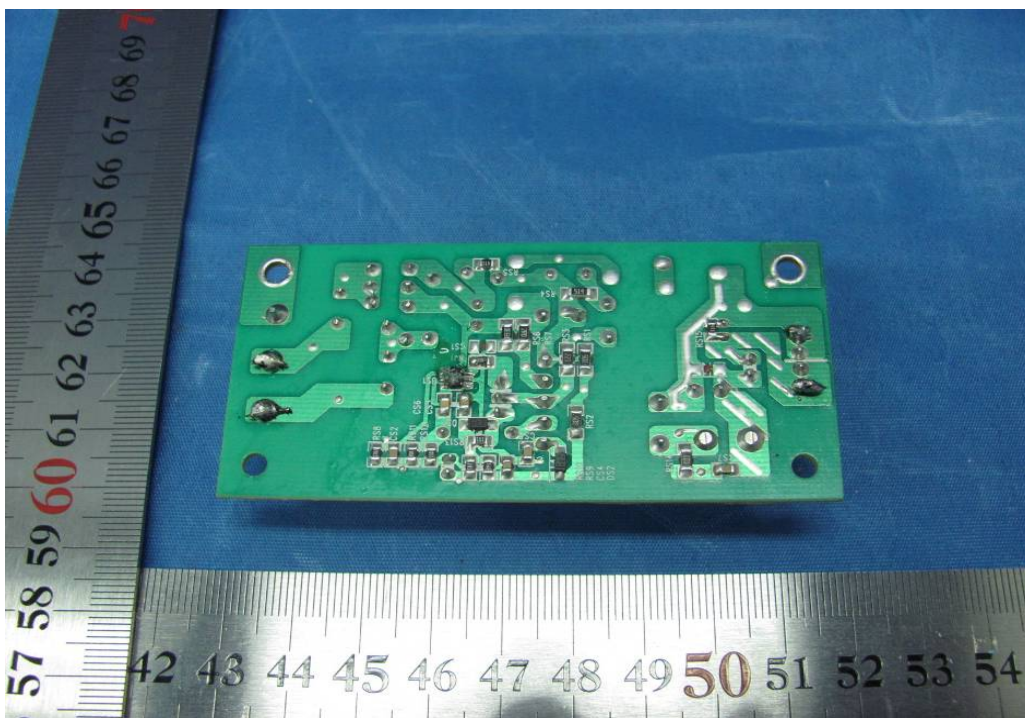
SOLDERING SIDE VIEW OF OPEN FRAME MODEL (Second structure)
